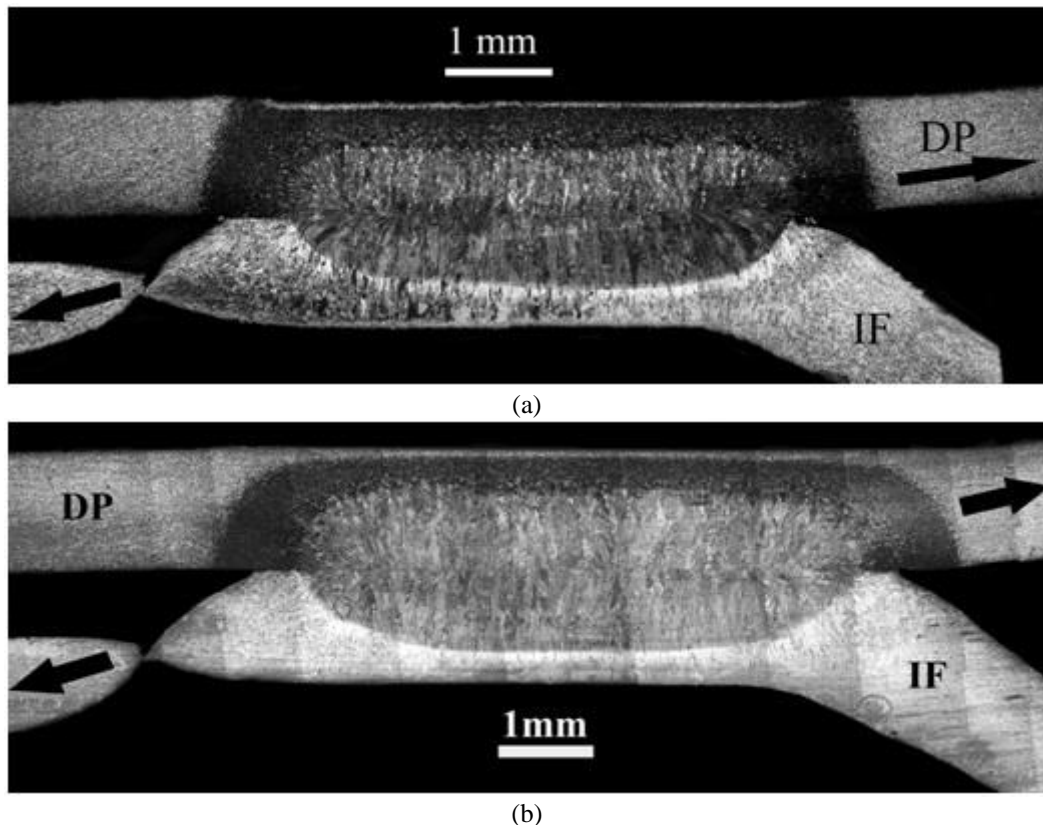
Macrostructure of interrupted shear tensile tested DP590/IFHS weld joint: a) S1 (b) S2.
